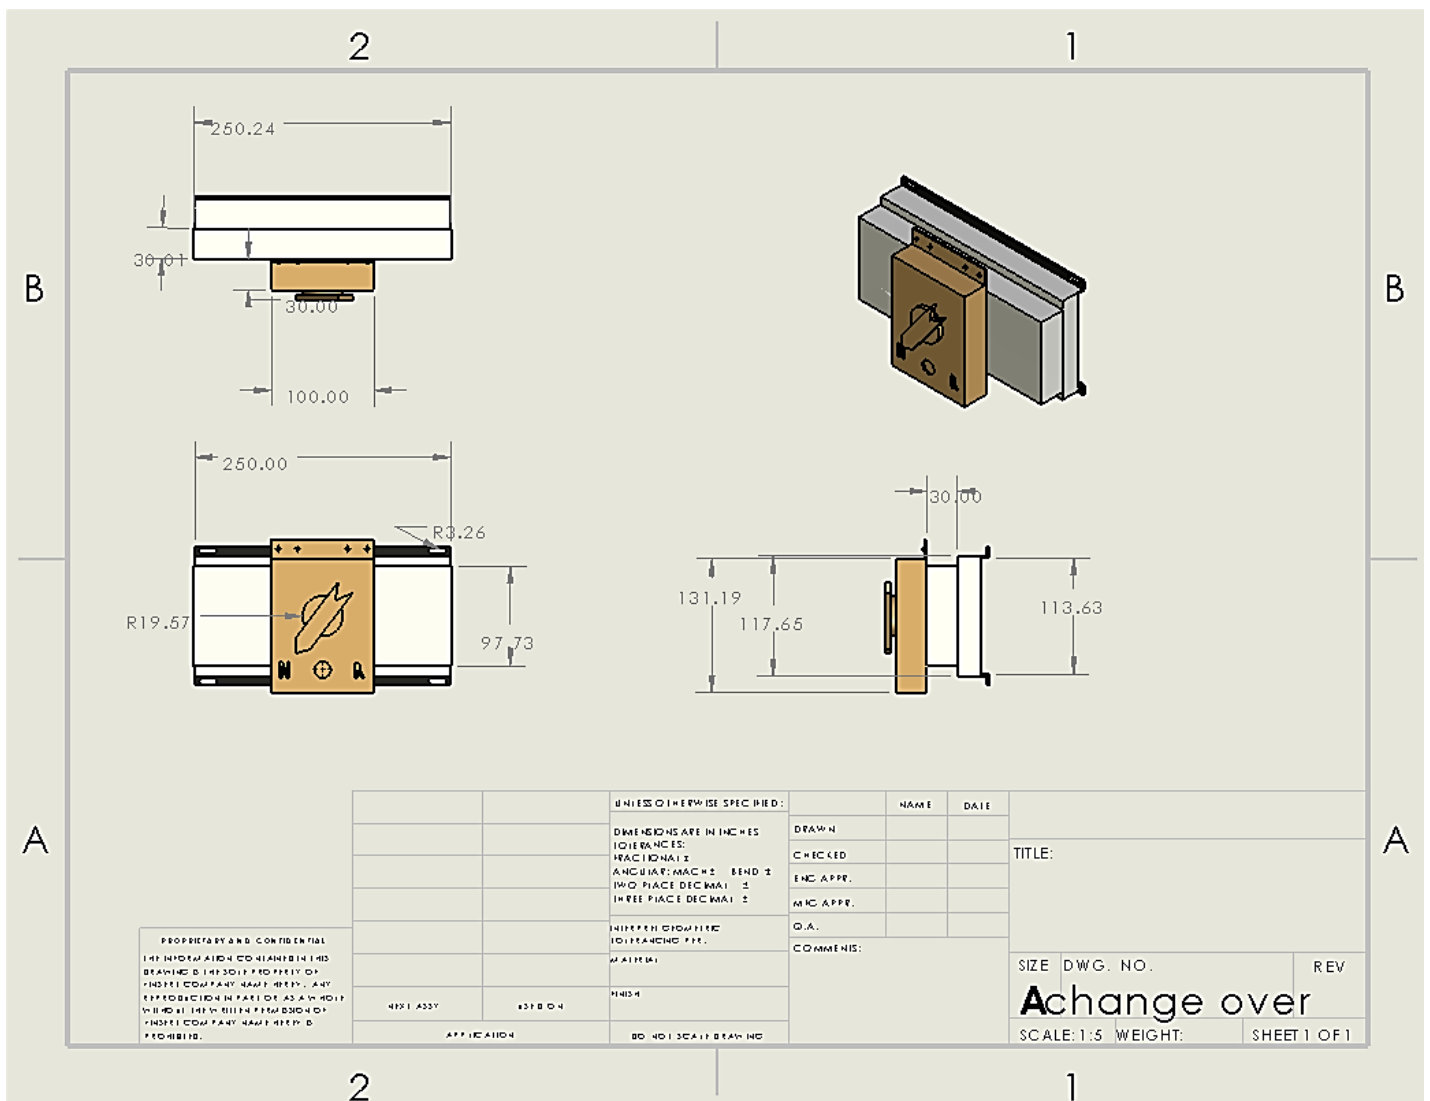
Transfer switch (change over) drawing with dimensions (mm)
